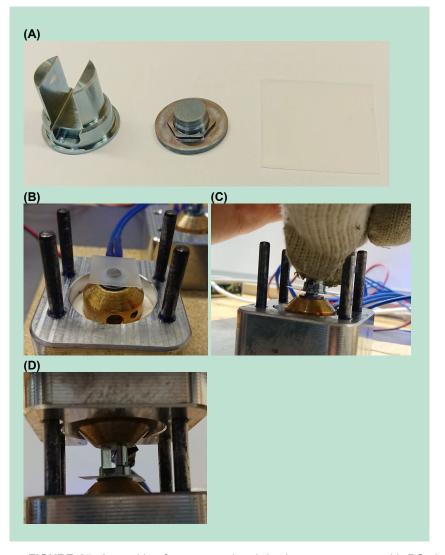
Assembly of two nanoprimed titanium sensor parts with PC sheet. (A) The two titanium parts and the PC sheet, (B) Heated bottom sensor part with PC sheet on top, (C) Top sensor part is carefully assembled with bottom part/PC sheet, and (D) 10 kg load of pressure applied.
